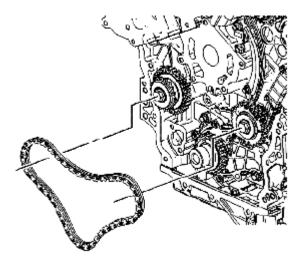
Aligning Crankshaft Sprocket Timing Mark With Stage One Timing Mark On Oil Pump Cover
